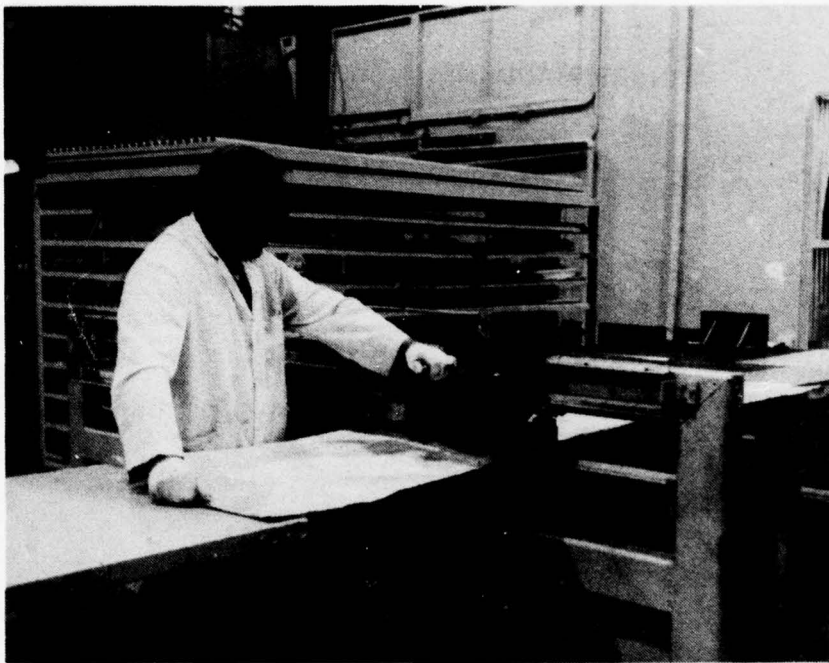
Boron/Aluminum Tape Cutting Machine
